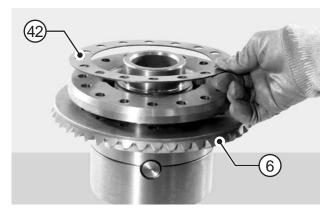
Remove the spacer (42) and the ring gear (6).
